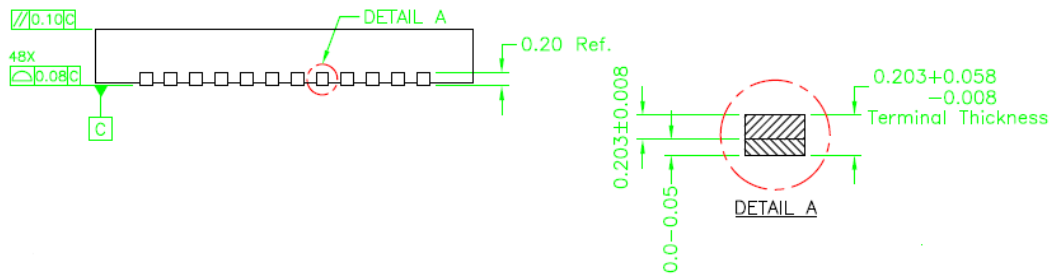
SSW105 QFN 6 x 6 mm Package Dimensions
